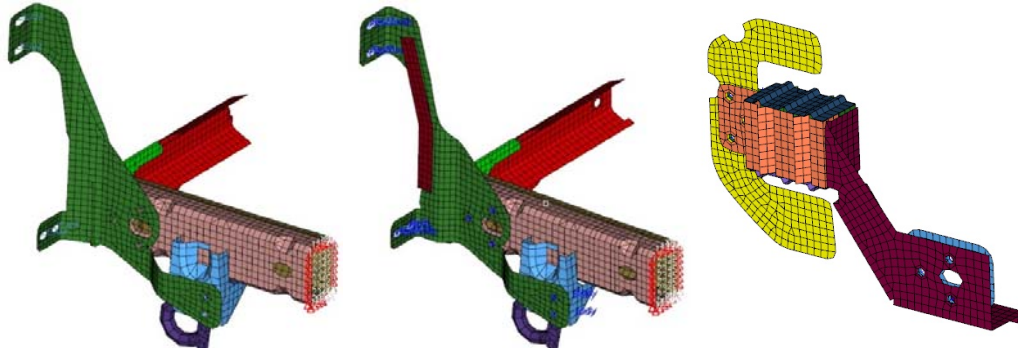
Configurations of the FPS mounts (from left to right: Flat plate, Plate with a fold, Plate with a corrugated box). Due to symmetry of the FPS and chassis assembly, for the sake of improving clarity, only LH mounts were shown.
